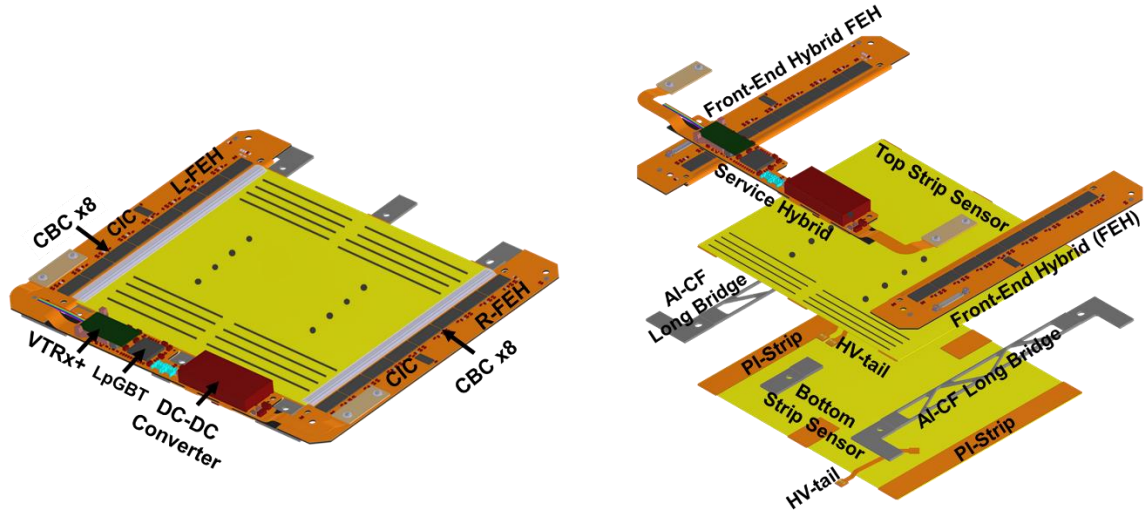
The assembled (left) and exploded (right) view of a 2S module are depicted, showing all the constituent parts used in its assembly in an exploded view [58].
